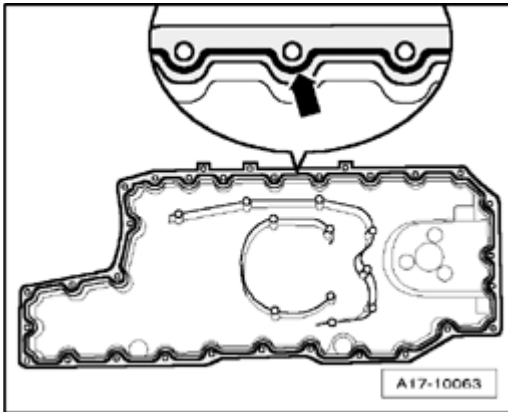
Applying Sealant Bead On Clean Sealing Surface Of Oil Pan Lower Part
